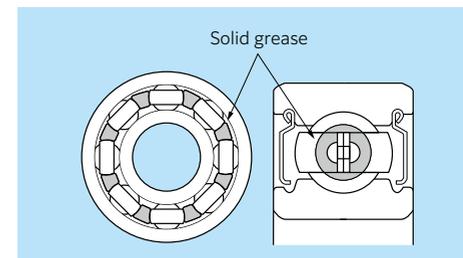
Deep groove ball bearing with spot-pack solid grease (Z shield) (Available for deep groove ball bearings)
